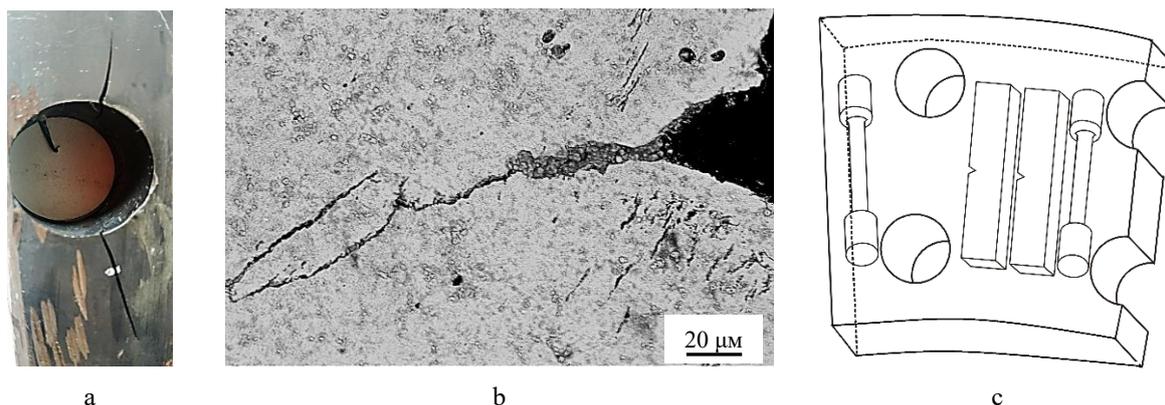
Macro- (a) and microscopic (b) view of cracks from a rivet hole and scheme of cutting samples (c) from the crest of a steam turbine rotor disk
